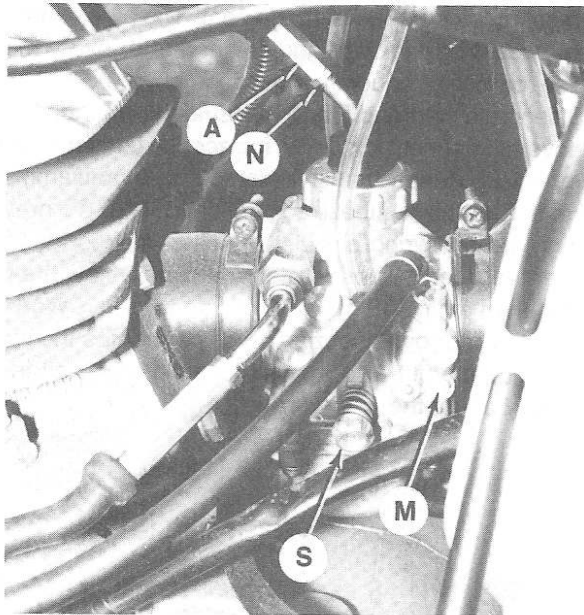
View of carburetor. Refer to text for carburetor adjustments.
